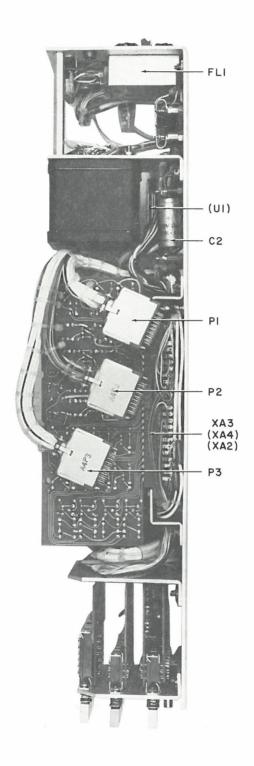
Type 791130 Control Module Assembly, A4, Right Side View, Component Locations
